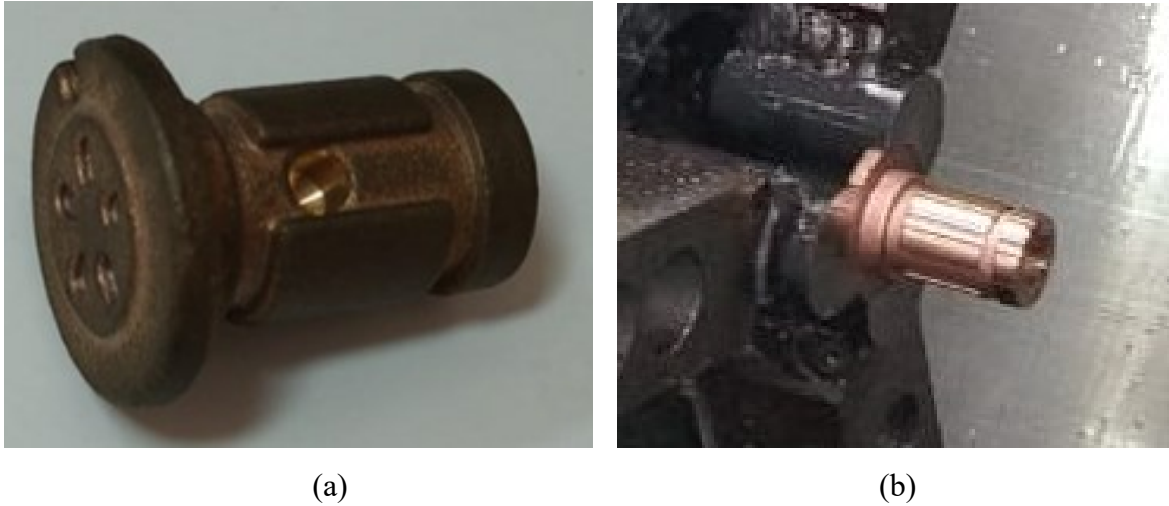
cast bronze journal (a) before and (b) during the machining process
